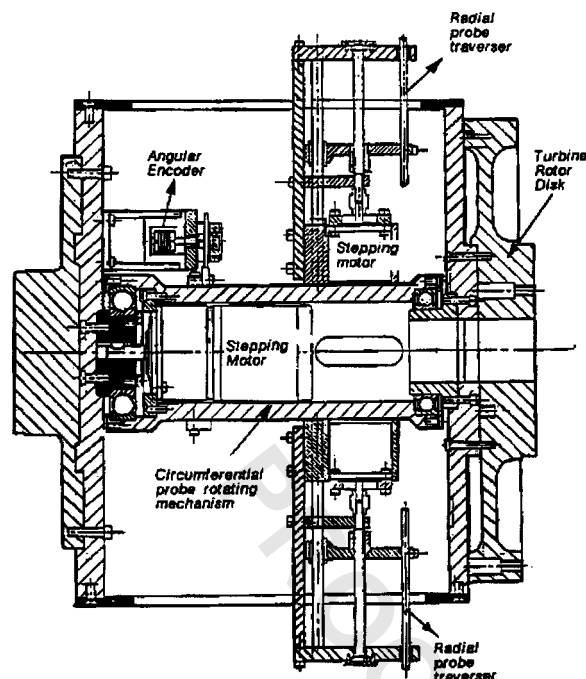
Rotating instrument and traversing package contained within the rotor drum
